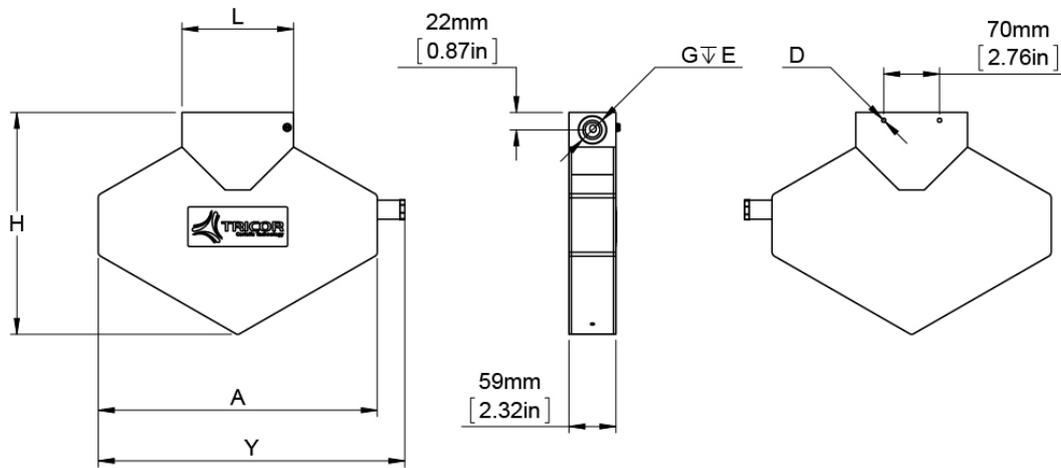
Meter Dimensions TCMH 0450, Ex3
